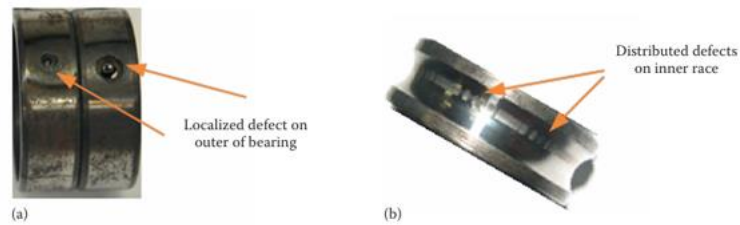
A bearing example. (a) Local defects. (a) Defects that are distributed
